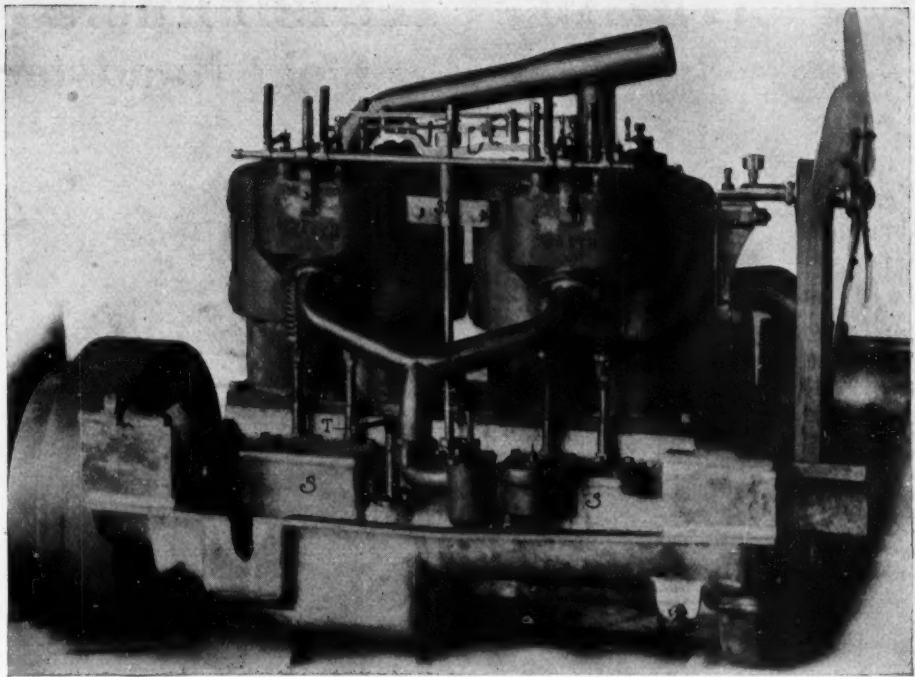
SHAFT S1 DRIVES THE GAETH IGNITER PARTS
